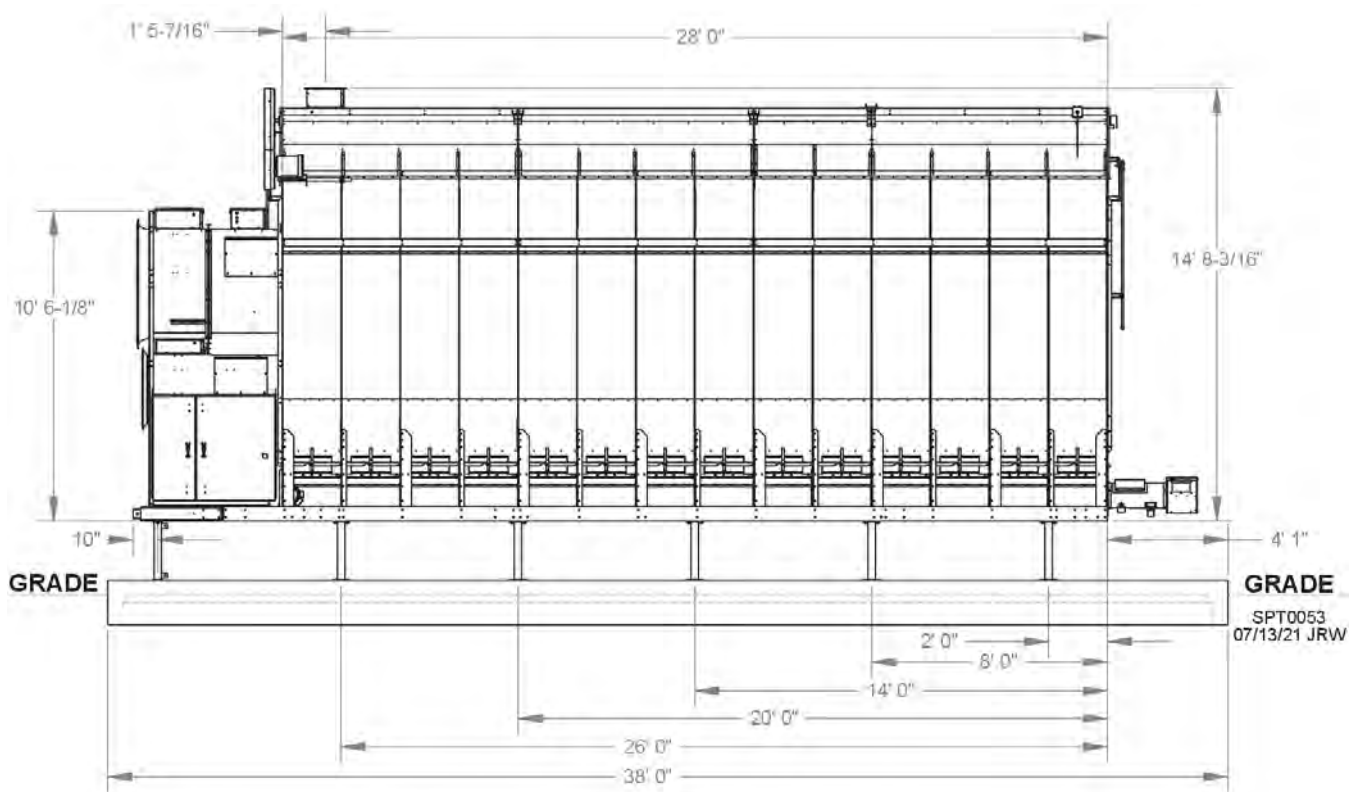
Leg locations & dimensions for 28' axial dryer
